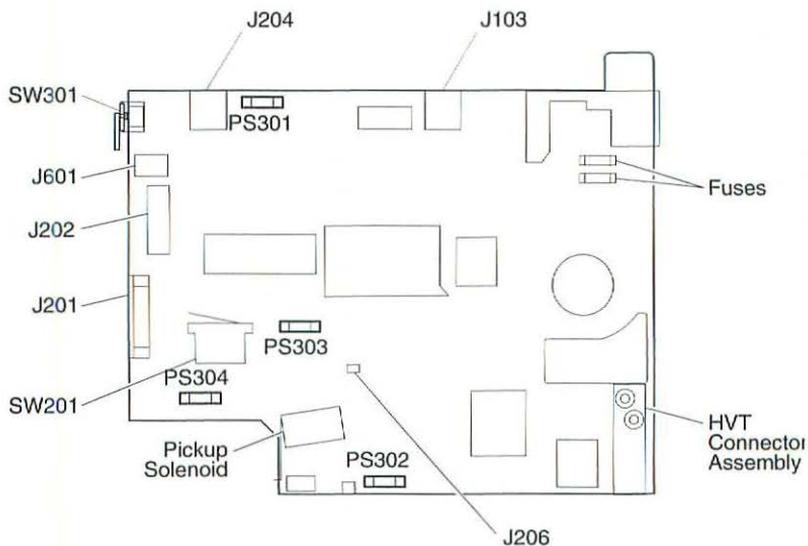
LaserWriter 4/600 PS Controller Assembly Board
